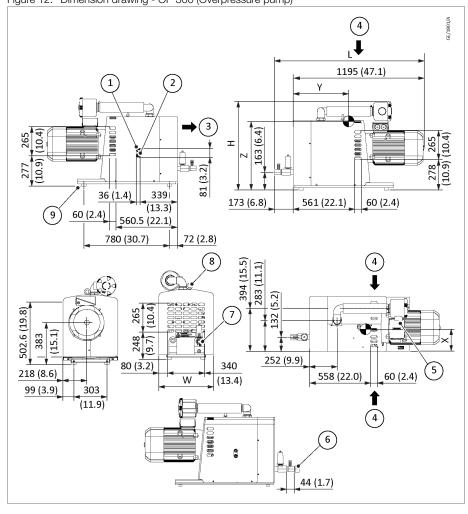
Dimension drawing - OP 300 (Overpressure pump)
